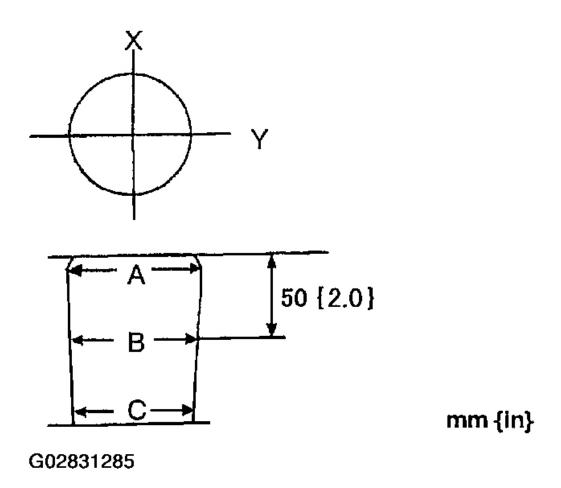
Measuring Cylinder Bore Taper Courtesy of MAZDA MOTORS CORP.
